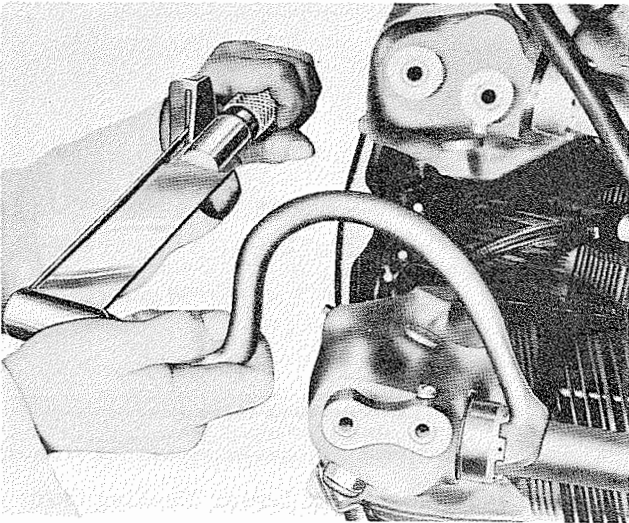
Torquing Push Rod Housing Nut at Cylinder
